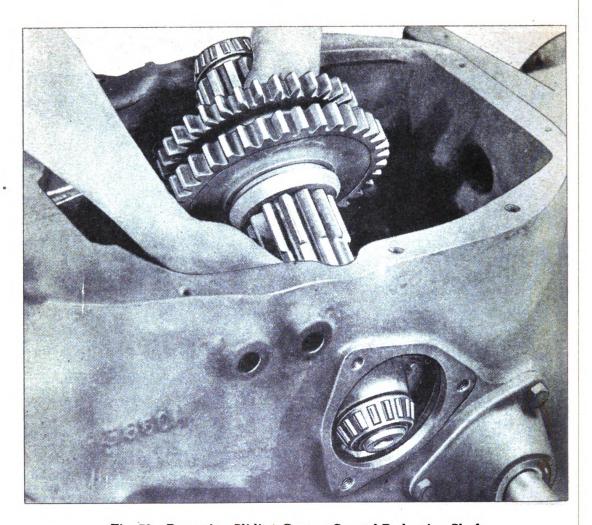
Removing Sliding Gear or Second Reduction Shaft
